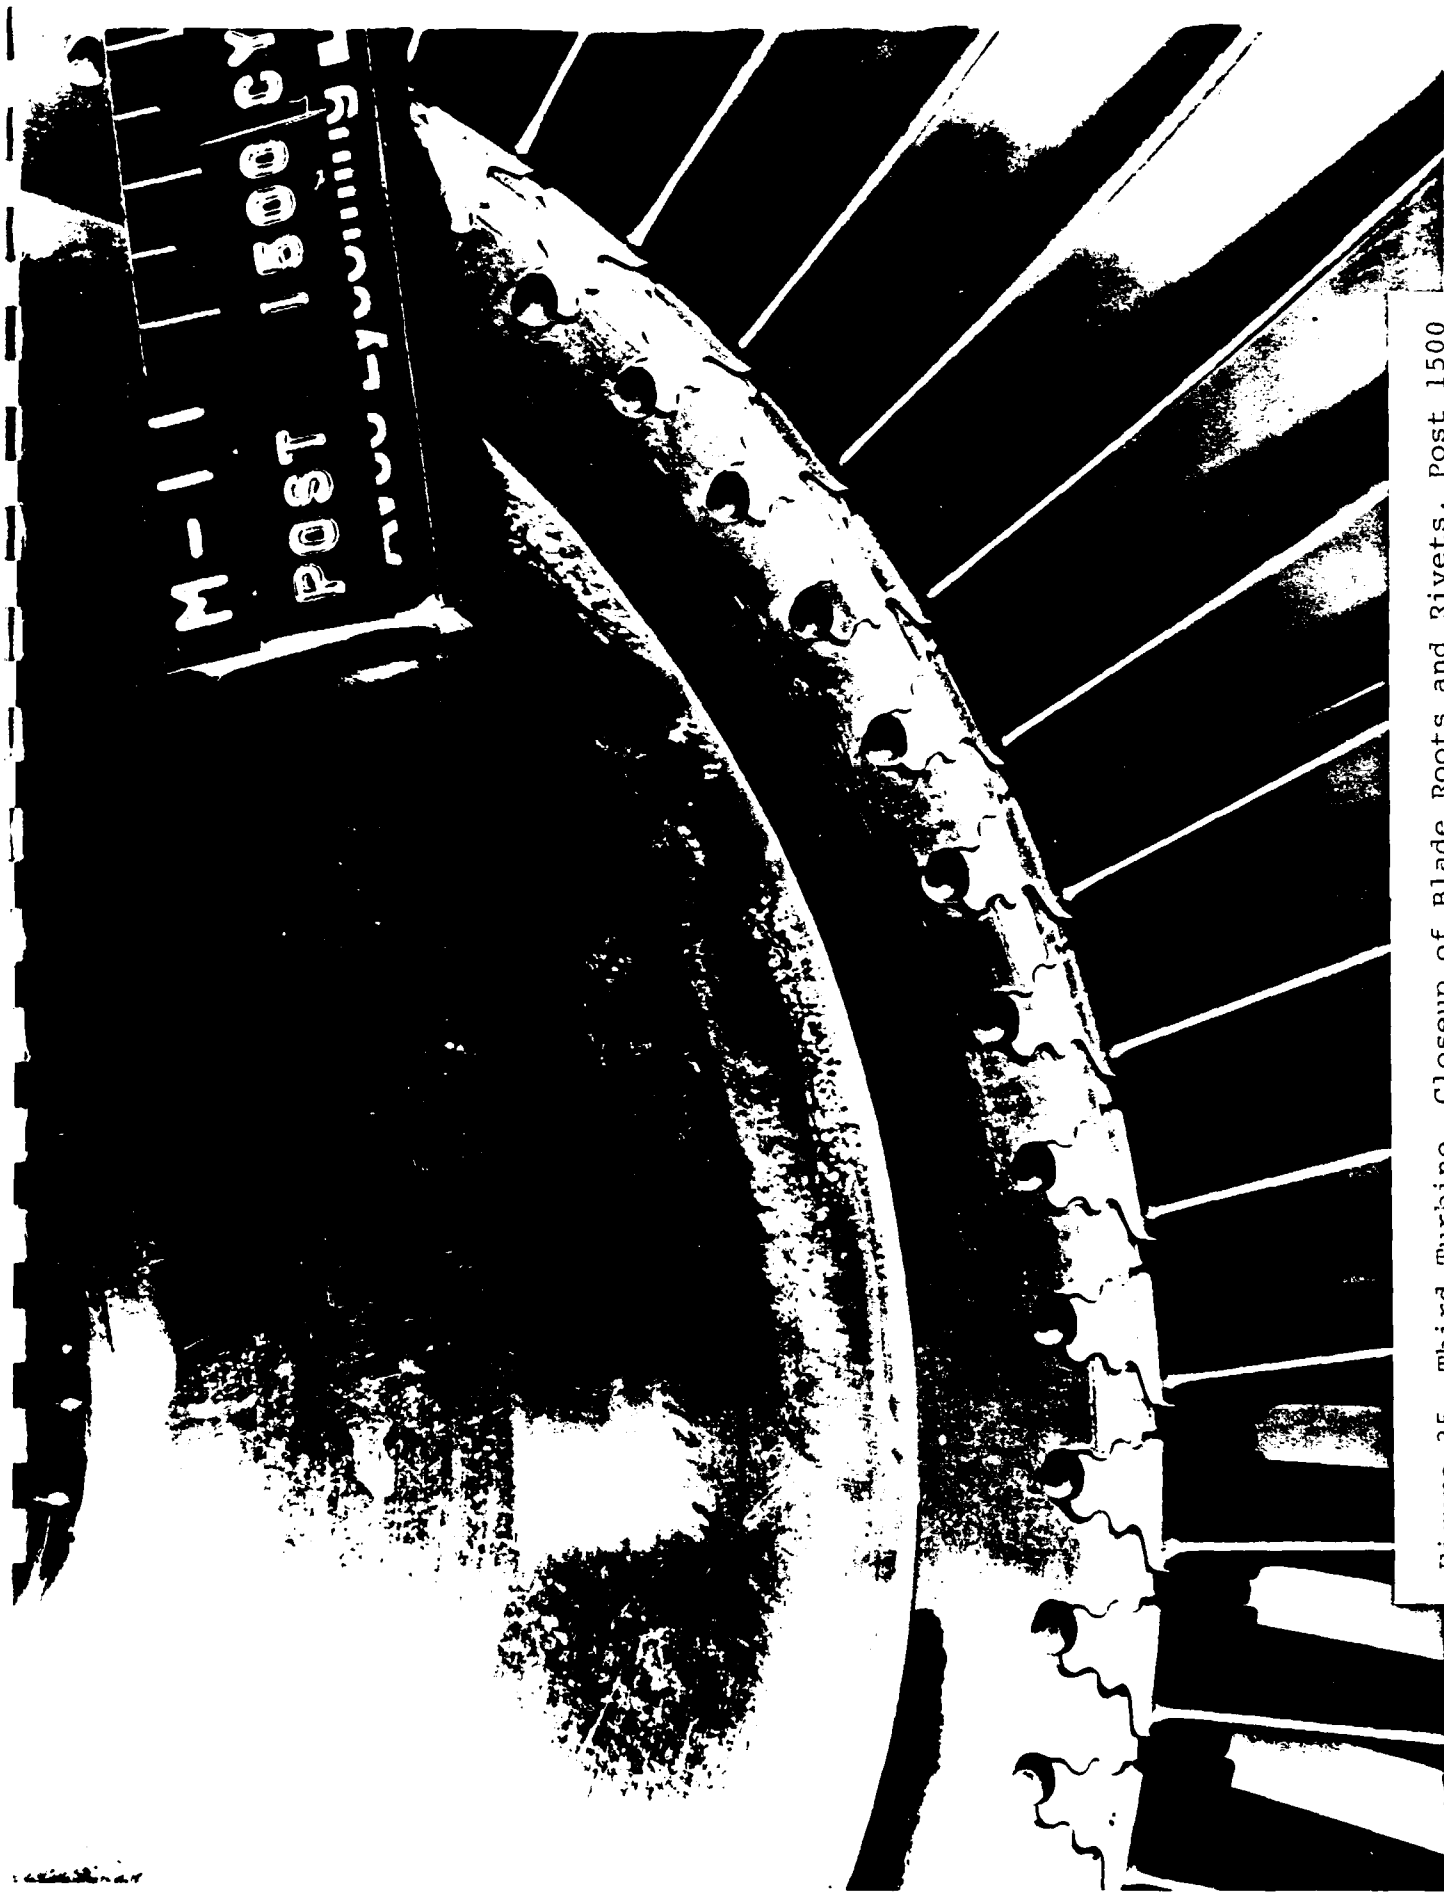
Third Turbine, Closeup of Blade Roots and Rivets, Post 1500
